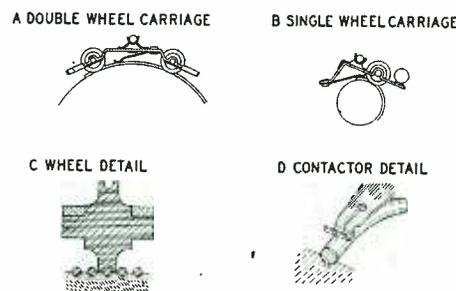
Details of the method of making contact. The single wheel carriage has the advantage over the double wheel unit of approaching much closer to the high frequency end of the coil
